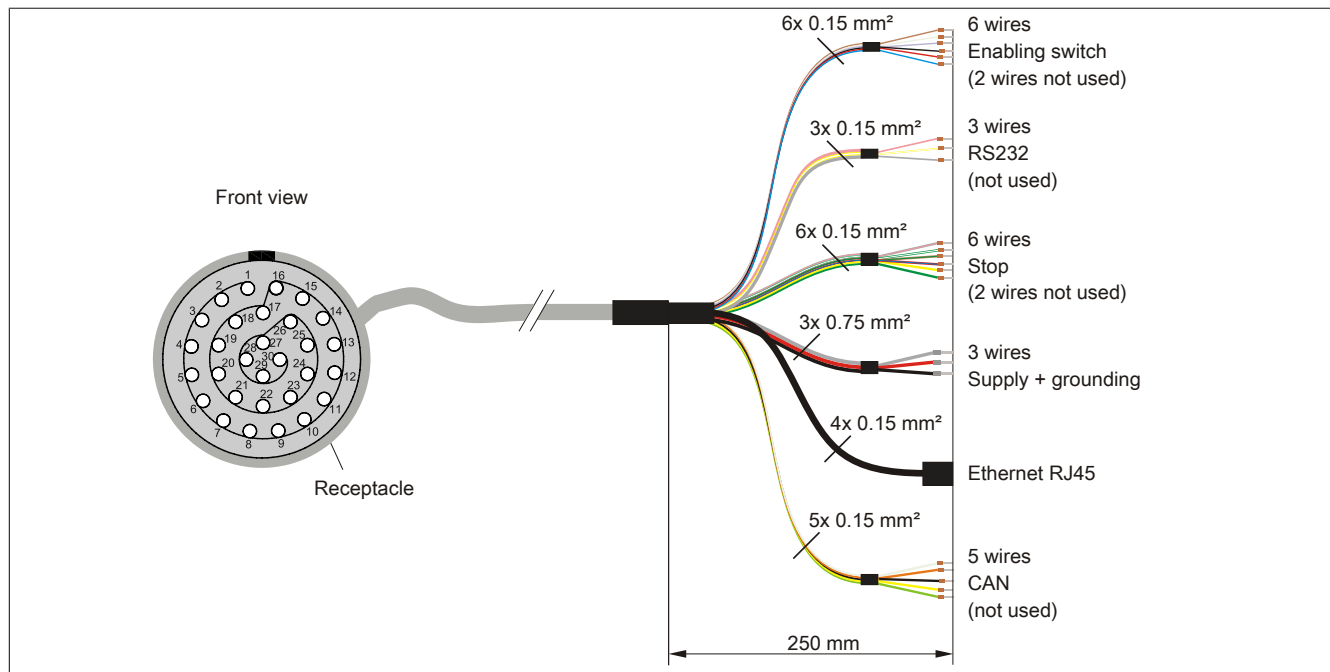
5CAMPC.0020-10 - Control cabinet cable layout
